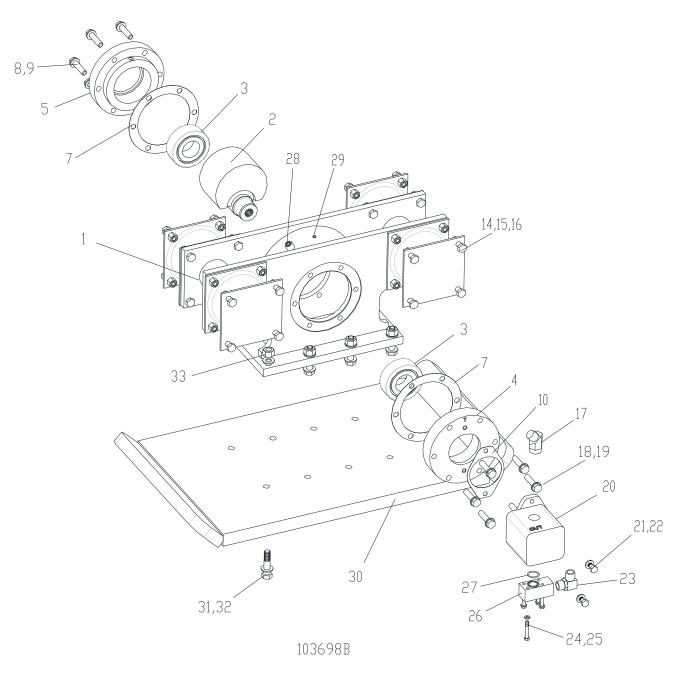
/ 103698(B) Dynamic Assembly with Bolt-on Compaction Plate Option
